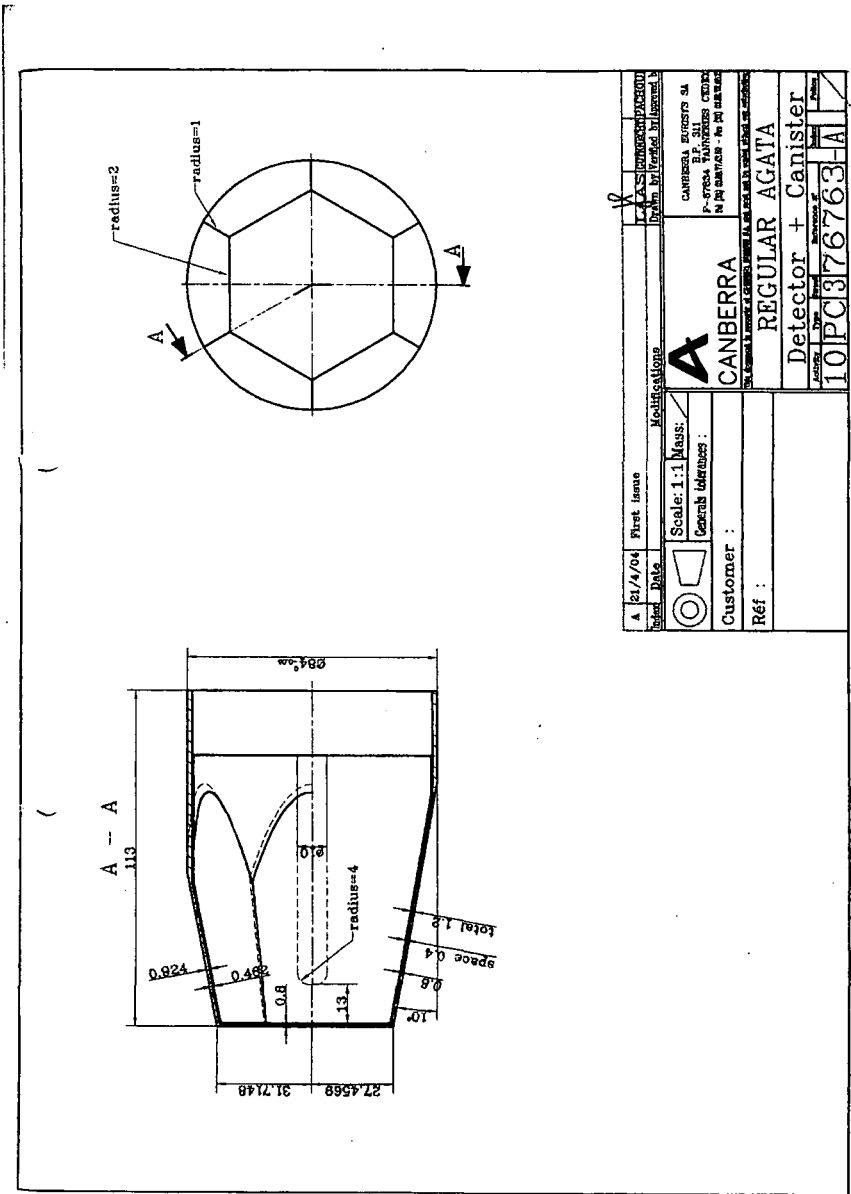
Canberra Eurisys technical drawing of the S002 AGATA prototype encapsulated crystal with tolerances.
